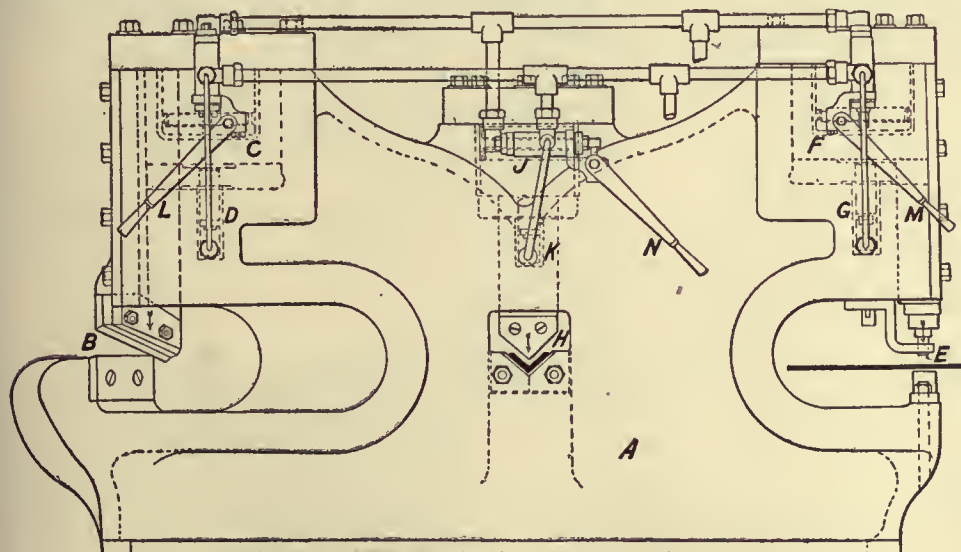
Hydraulic Punching and Shearing Machine. (Musgrave Brothers, Leeds.)
